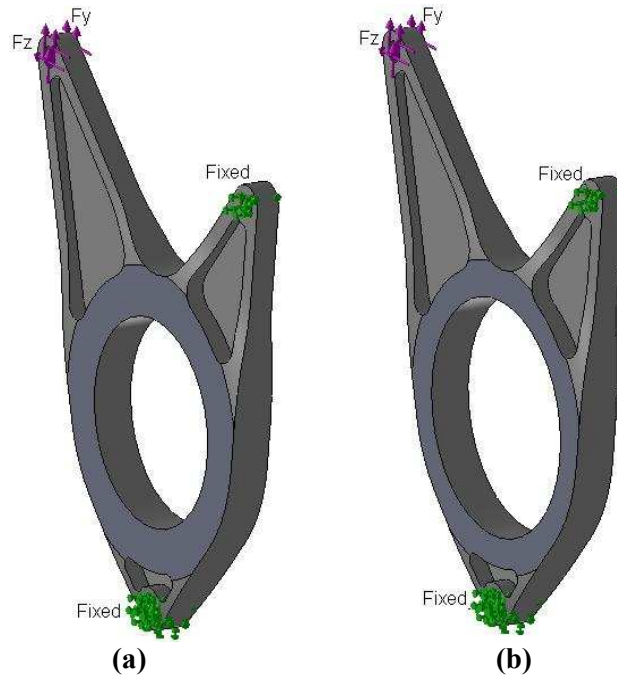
(a) Initial bearing block design with a hole diameter of 63.5 mm and (b) final design with a hole diameter of 72 mm.
